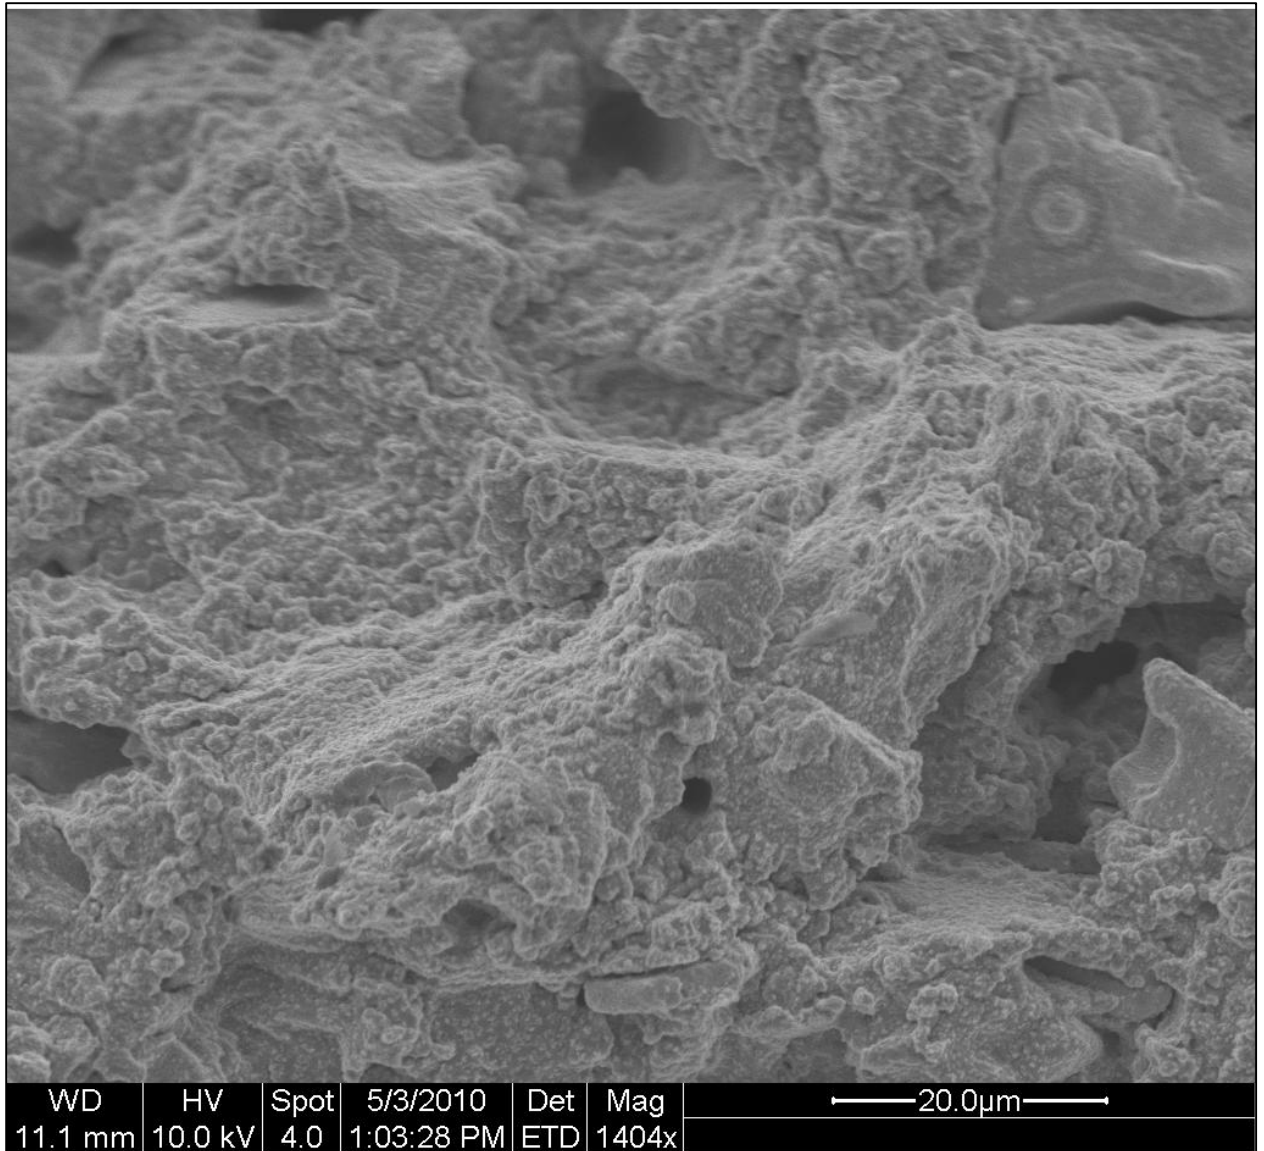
Haynes 230 On Heating 2249 sample fracture surface. A partially liquated carbide can be seen in the upper right corner of the image.
